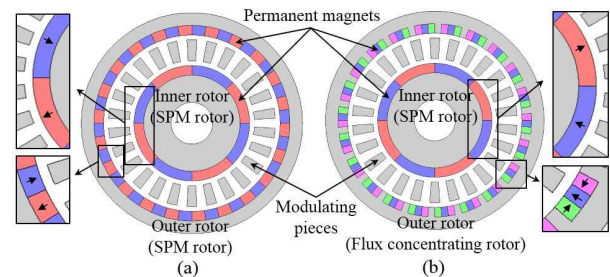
Structure of the coaxial magnetic gear (CMG): (a) Surface mounted PM coaxial magnetic gear (SPM CMG), (b) Flux concentrating coaxial magnetic gear (FC CMG)
